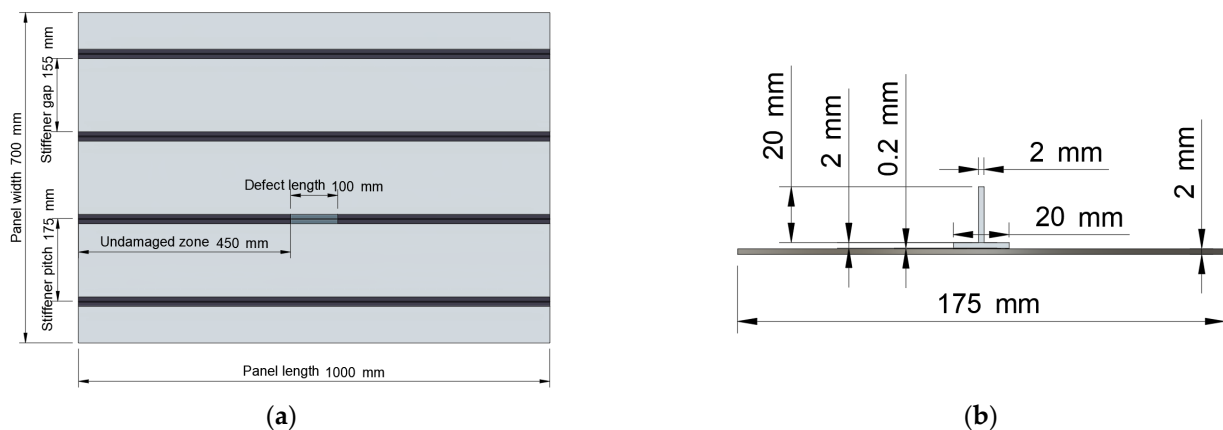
Geometry of model: (a) top view of structure with dimensions; (b) front view of repetitive element with detailed dimensions.
